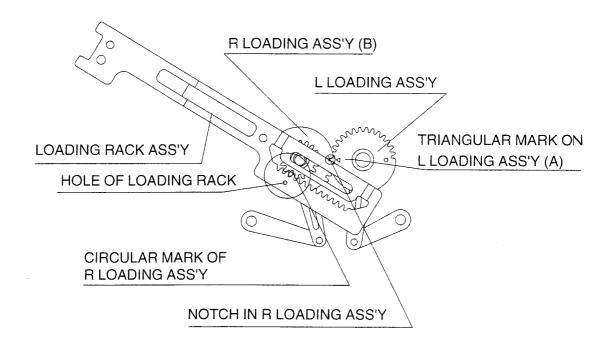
DATUM POSITION OF LOADING RACK ASS'Y & R/L LOADING LEVER ASS'YS
